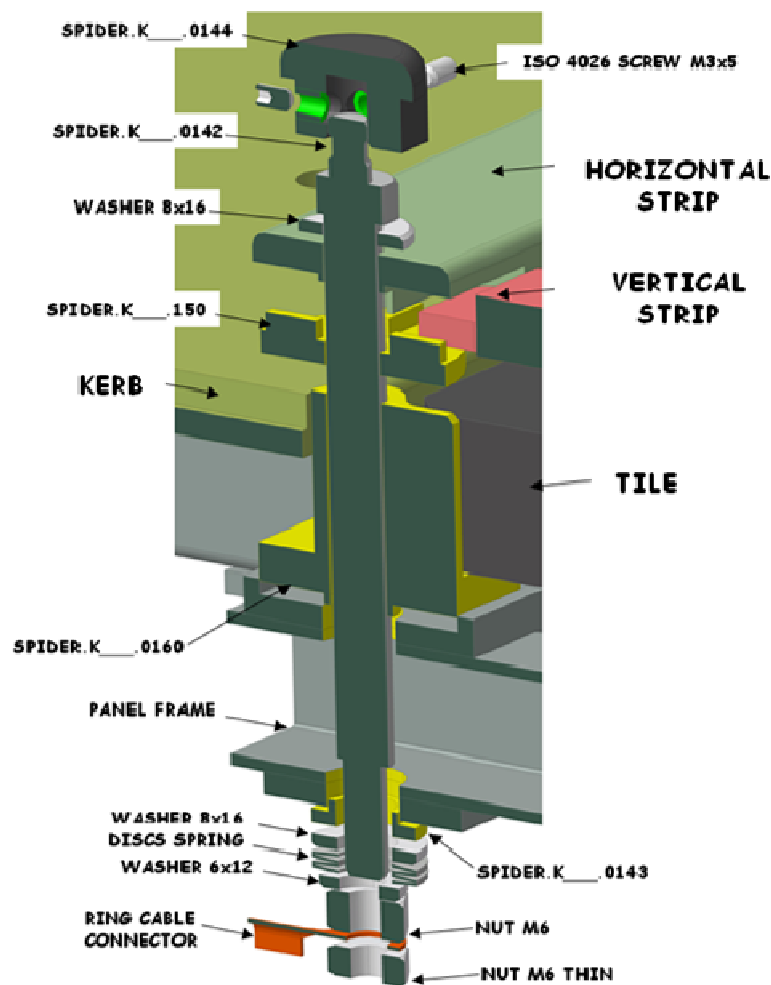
Kerb, strips and tile fixing system to the frame.
